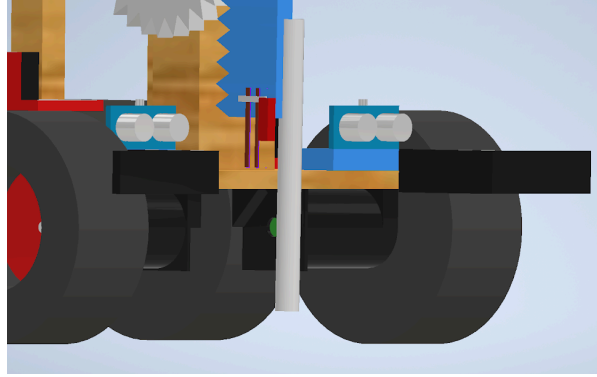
The CAD drawing above pictures all the sensors that will be located on the arm. In total, the salinity sensor, the depth sensor, and the tube for the pump mechanism will be located on the rack and pinion.
